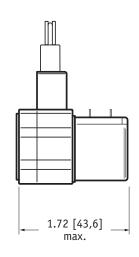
Outline Drawing (w/o mounting bracket):
